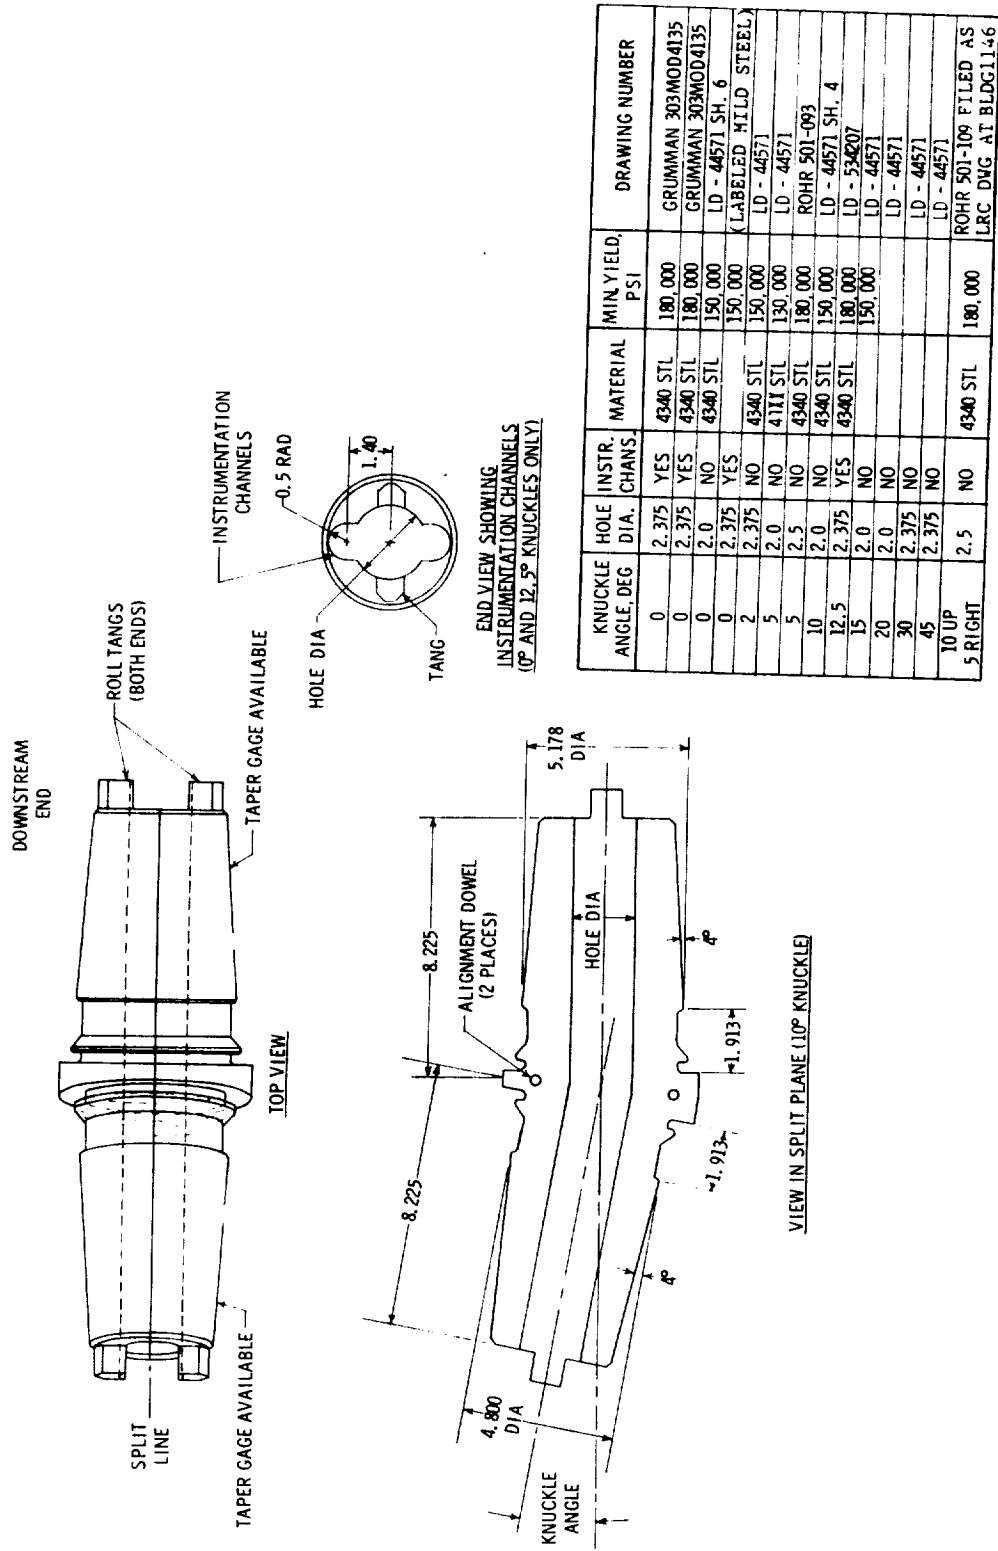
Sketch of typical knuckles available. (All dimensions are in inches unless otherwise indicated.)
